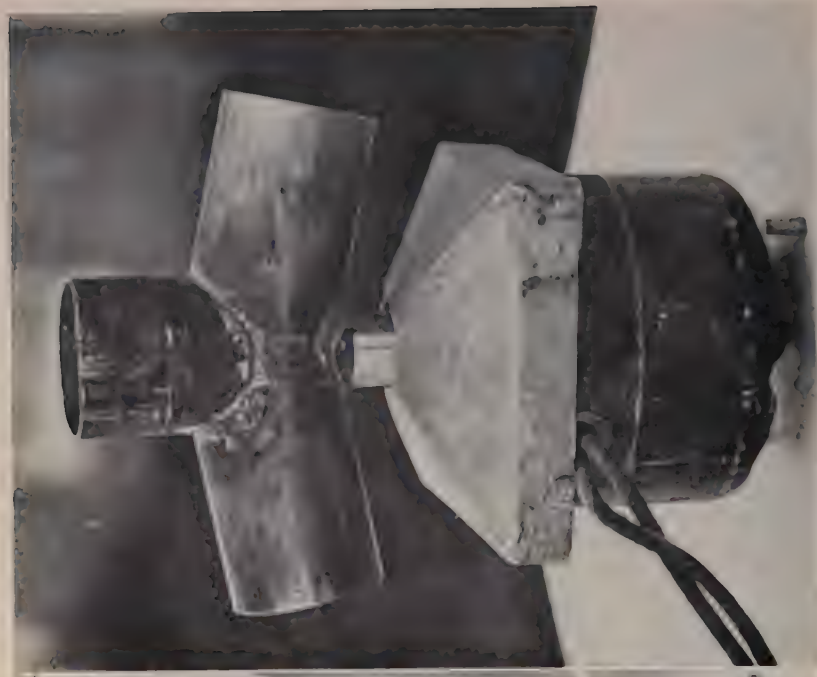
(*Right*). Side view of rotating tube assembly.
